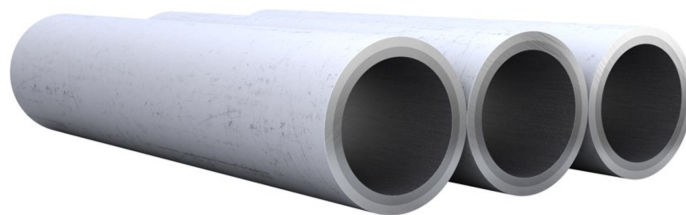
Clad tubes manufactured by Sandvik (sleeve coextrusion process). These are also known as composite tubes. [2]
